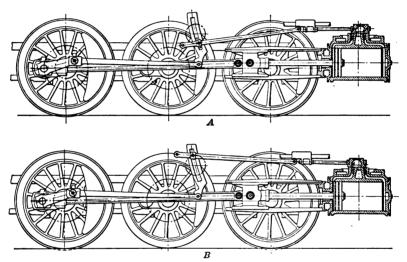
Walschaerts valve gear. Introducing outside lap.
